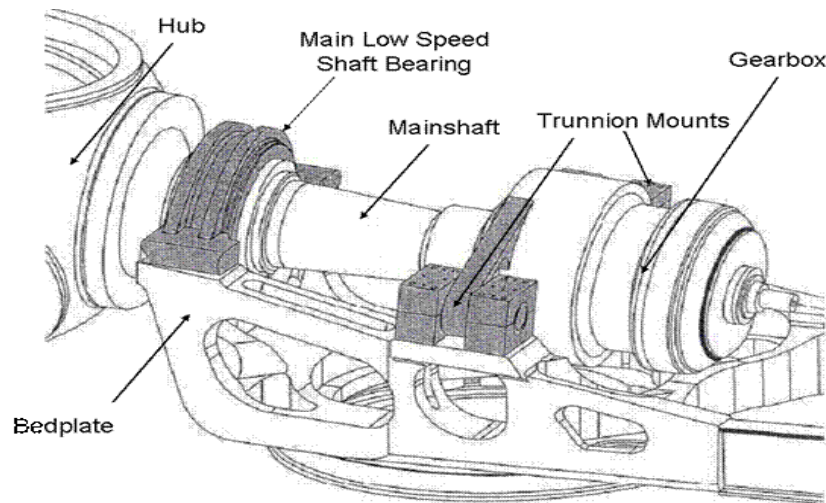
Traditional Three Point Slow Speed Axle and Gearbox Mounting [6]
